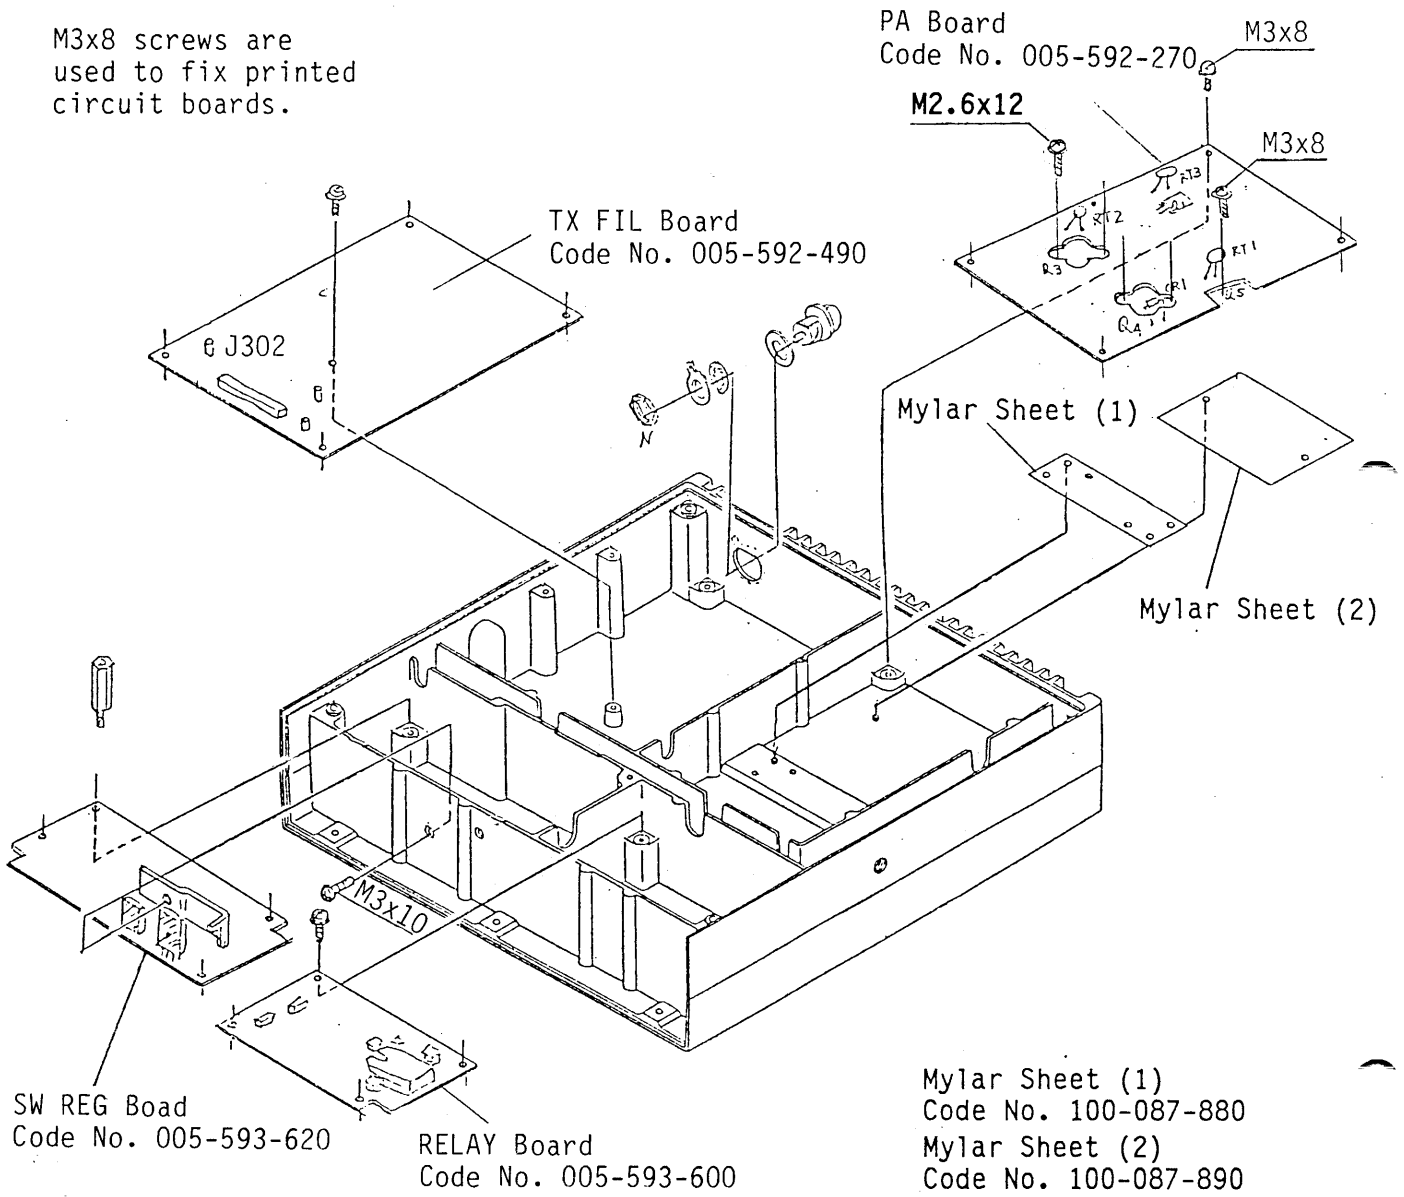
Disassembly of P.C. Boards from Top Chassis
